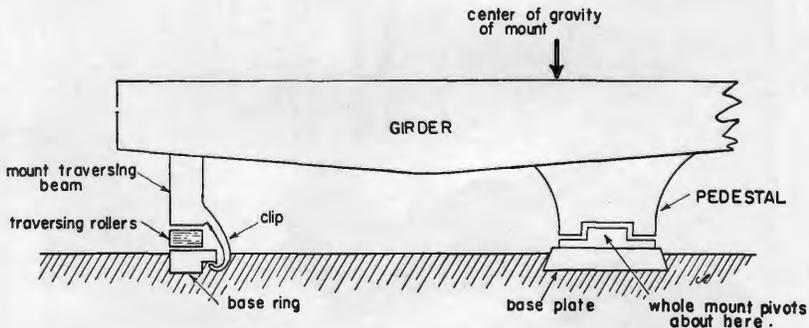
Mount traversing mechanism, 14-inch railway gun.
